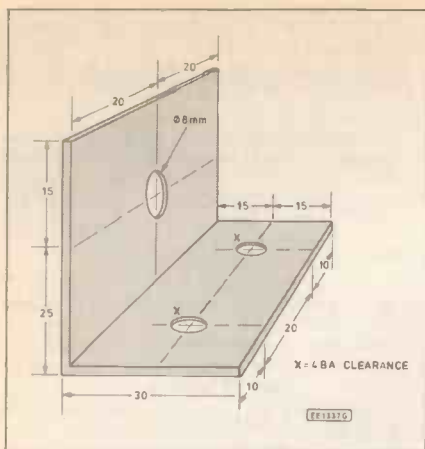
Dimensions of the aluminium mounting bracket for the mains suppressor SP1.
